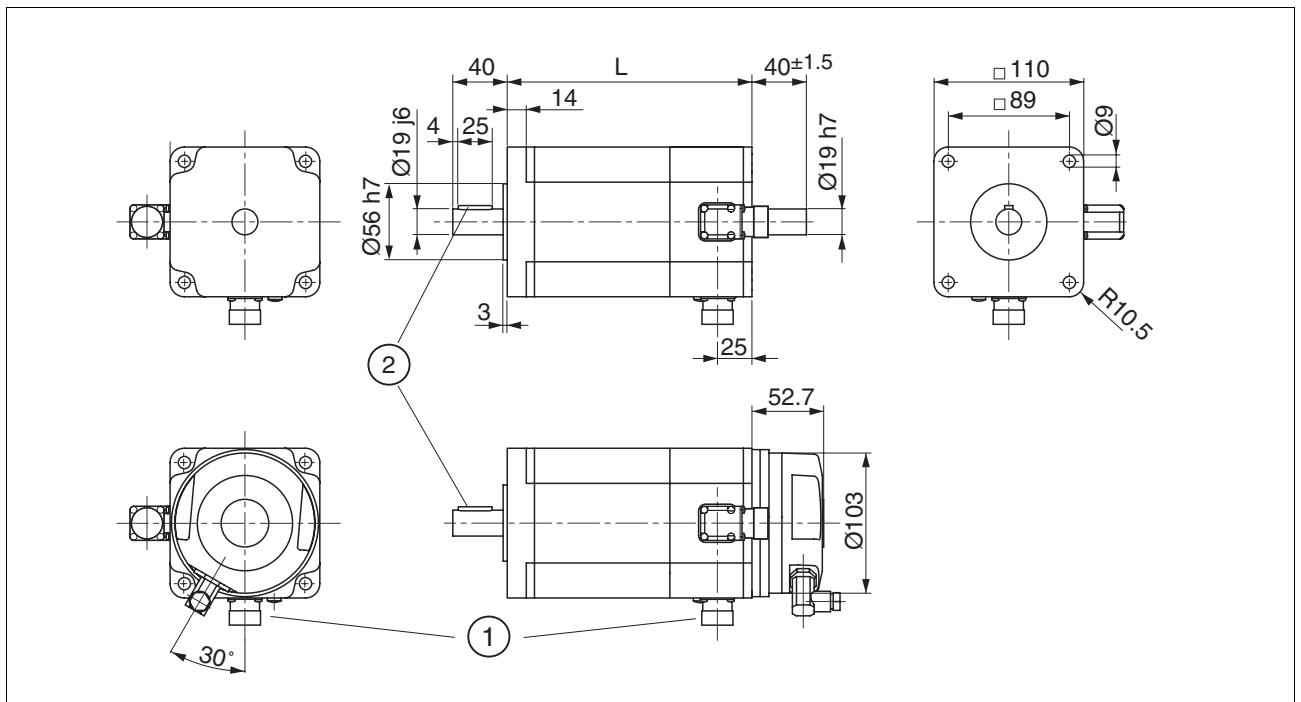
BRS3A dimensional drawing connector version with encoder
